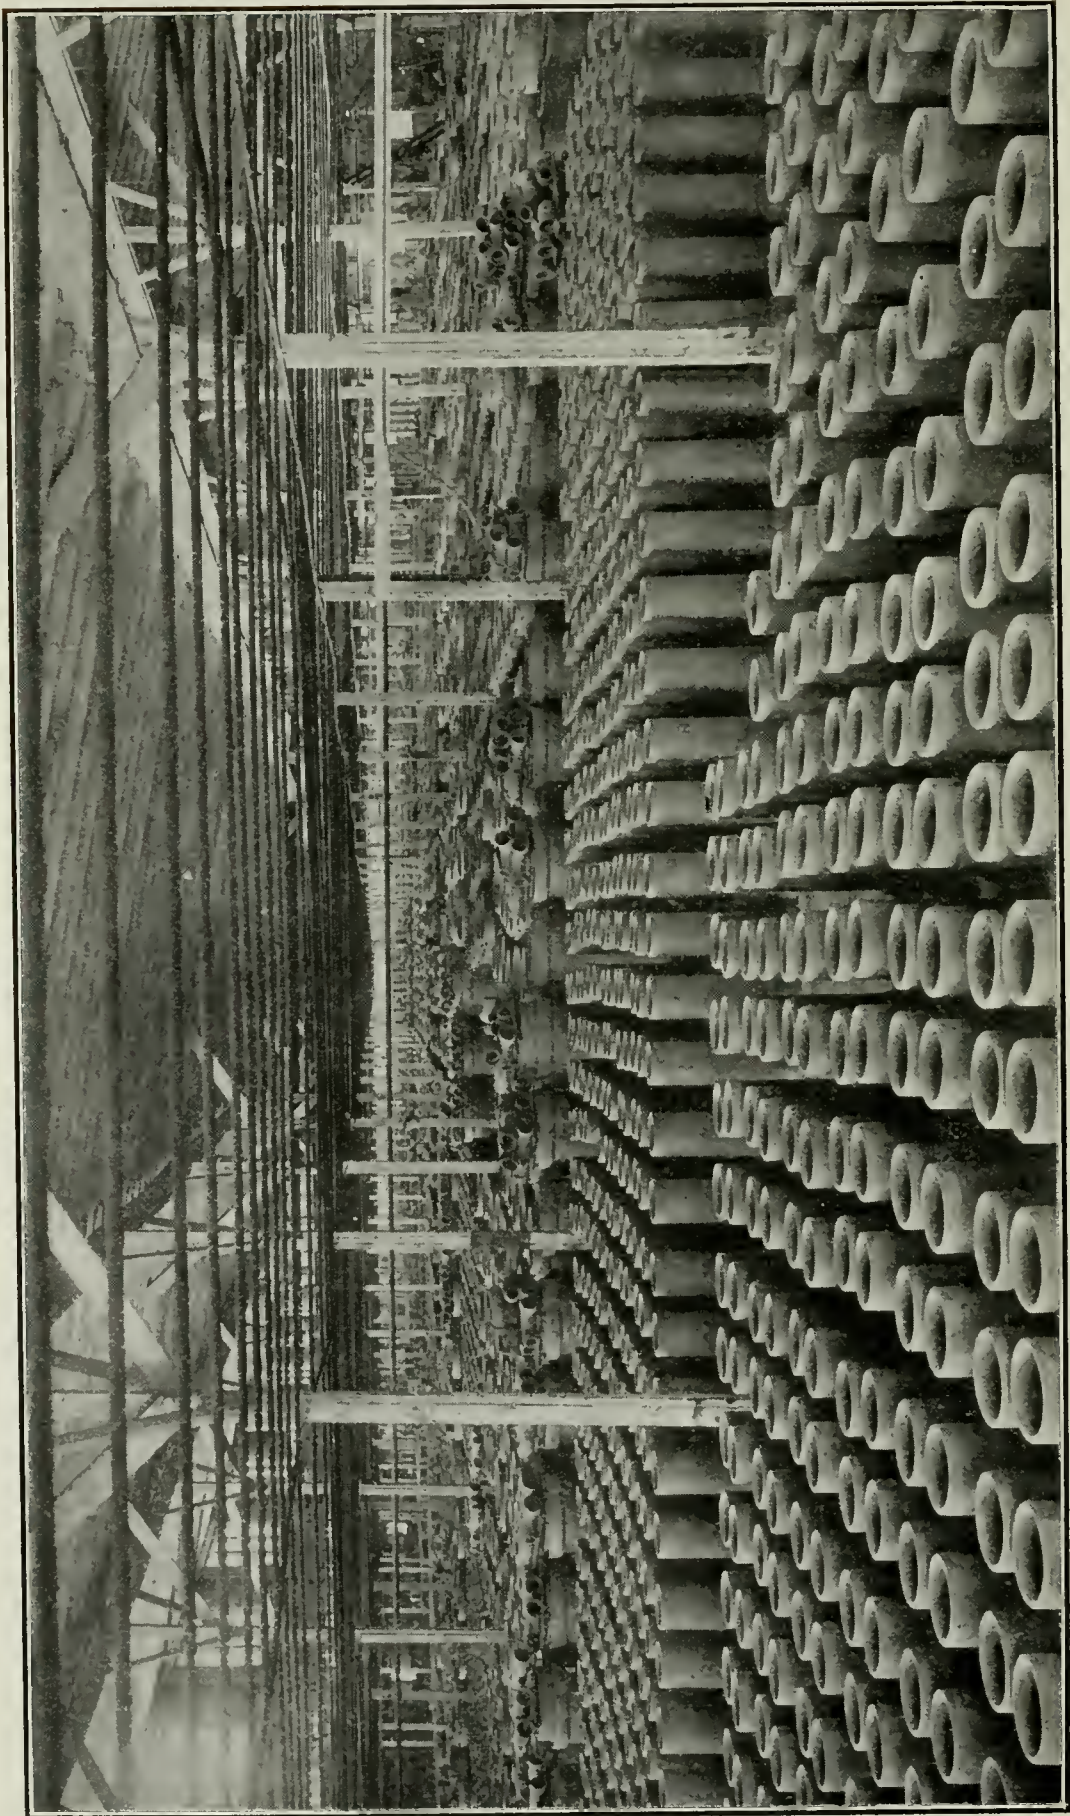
Drying floor, Los Nietos plant of Pacific Clay Products Company, Los Angeles County.
